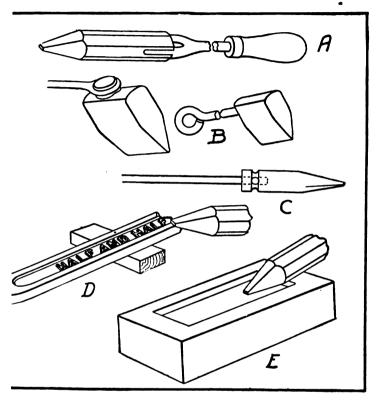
Forms of Soldering Coppers and How to Tin Them.
